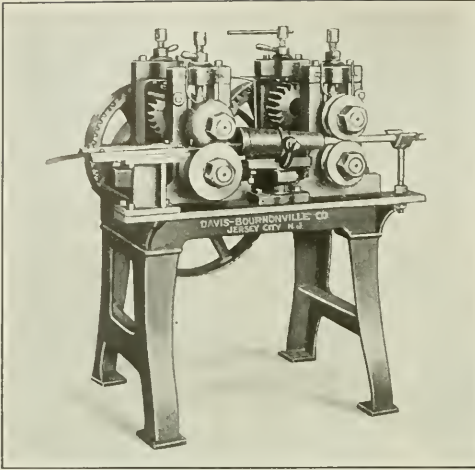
Two-roll Stand Type of Tube-forming Mill
